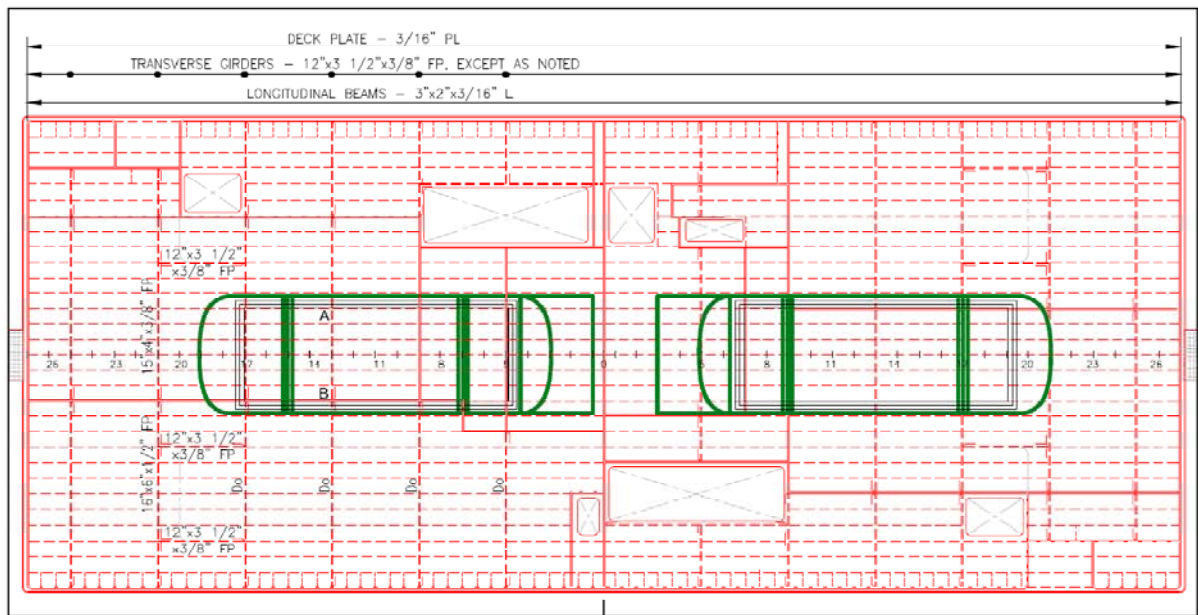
Bridge Deck Structural Arrangement of Two Tanks
